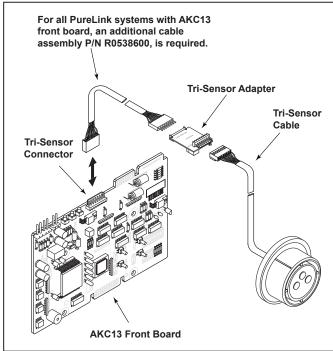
Installation of the Tri-Sensor Adapter on an AKC13 Front Board
